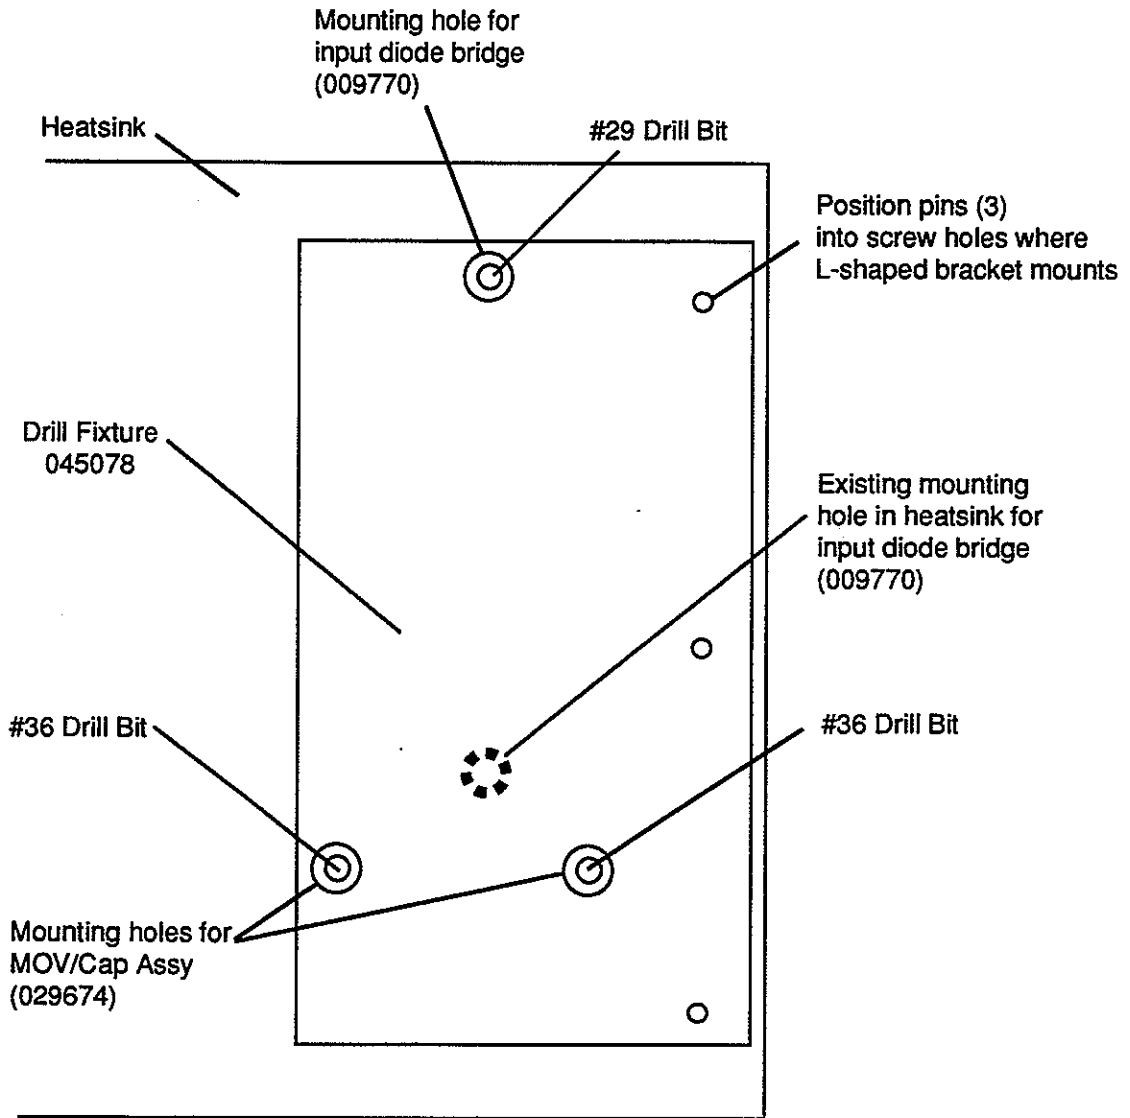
Drill Fixture 045079 Positioned on Heatsink
